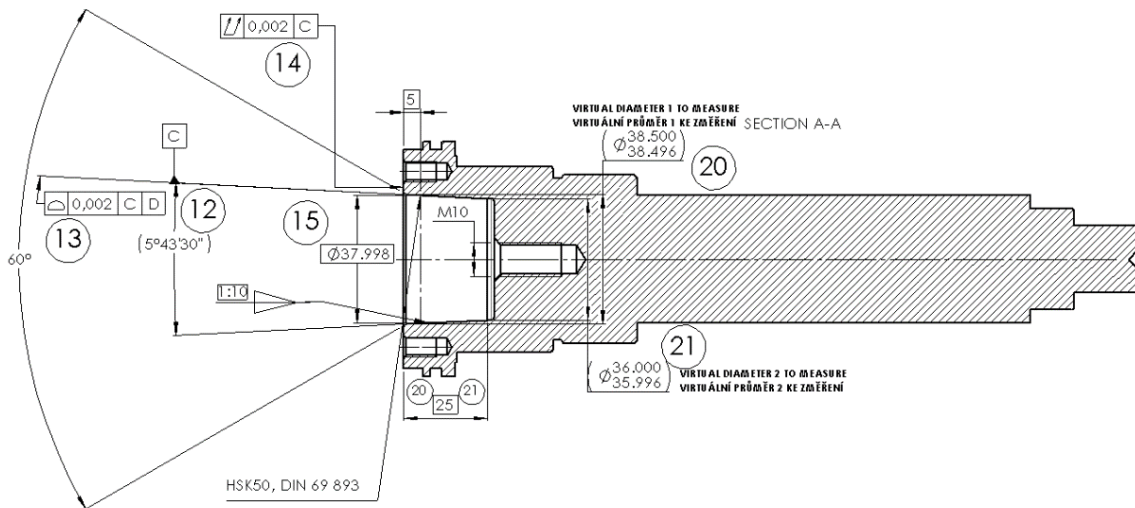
Geometrical tolerances and dimensions to be measured on the shaft
